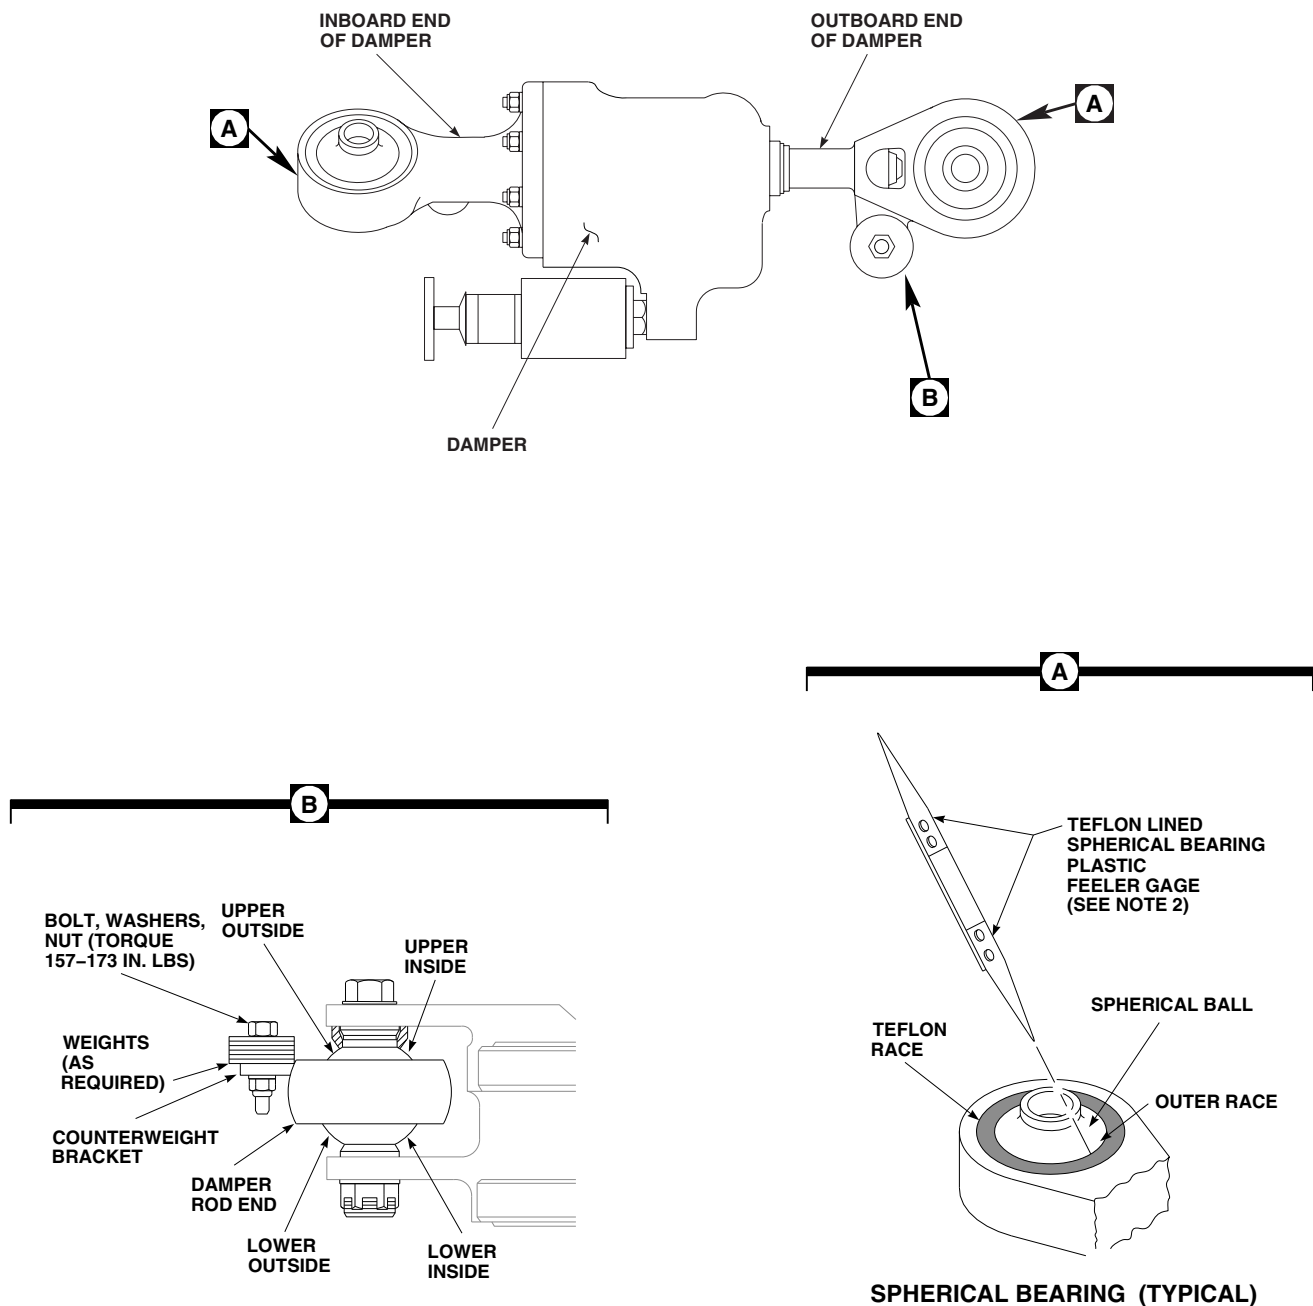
INSPECT DAMPER BEARINGS
